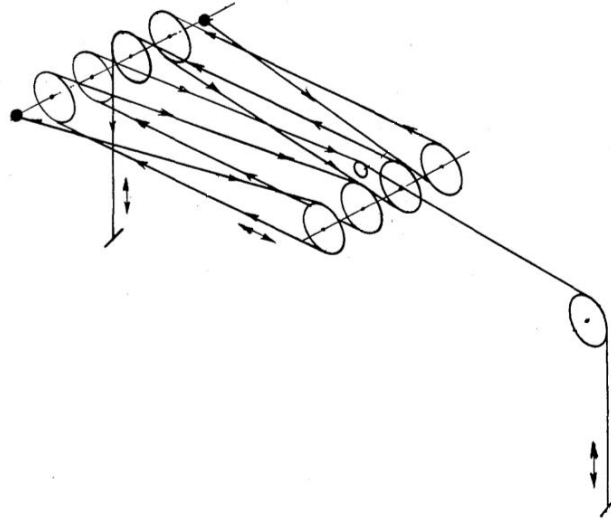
Schematic drawing of cable and sheave arrangement.
